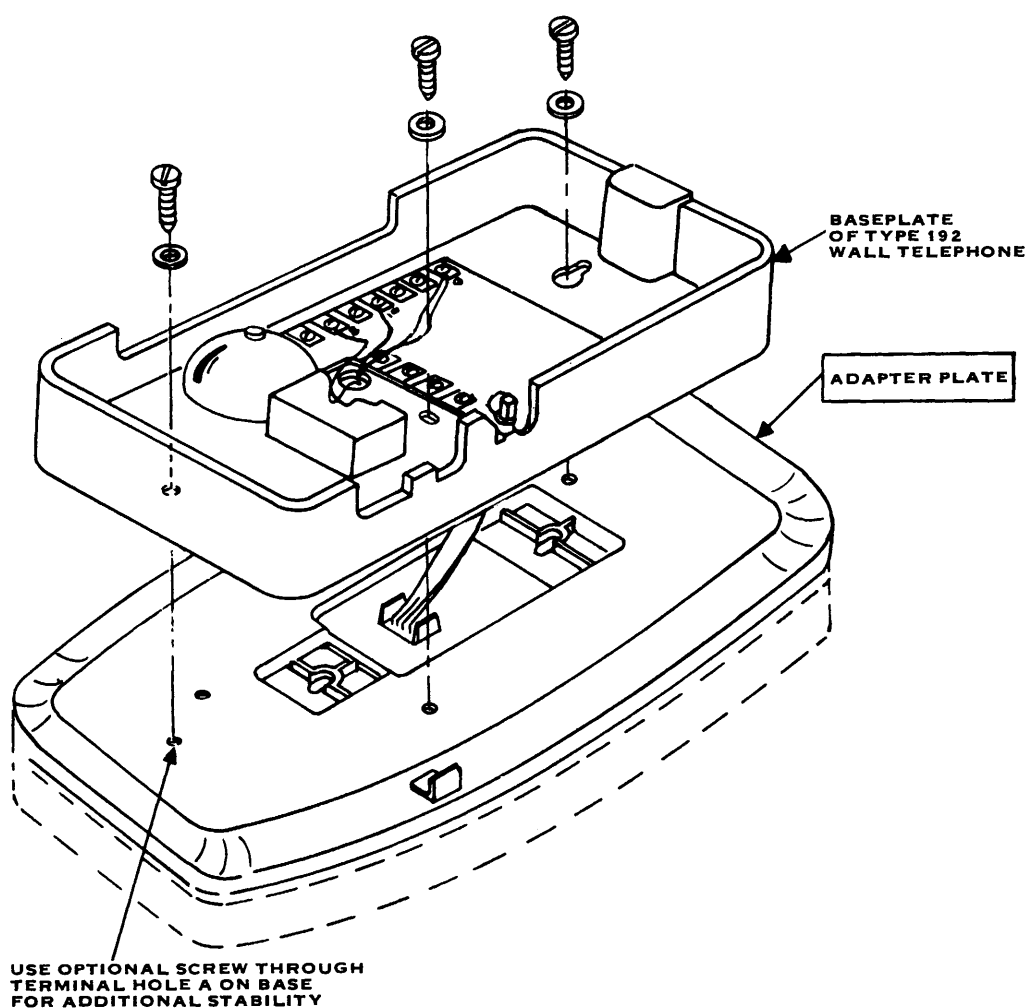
Installation of Type 192A Wall Telephone on Adapter Plate.
